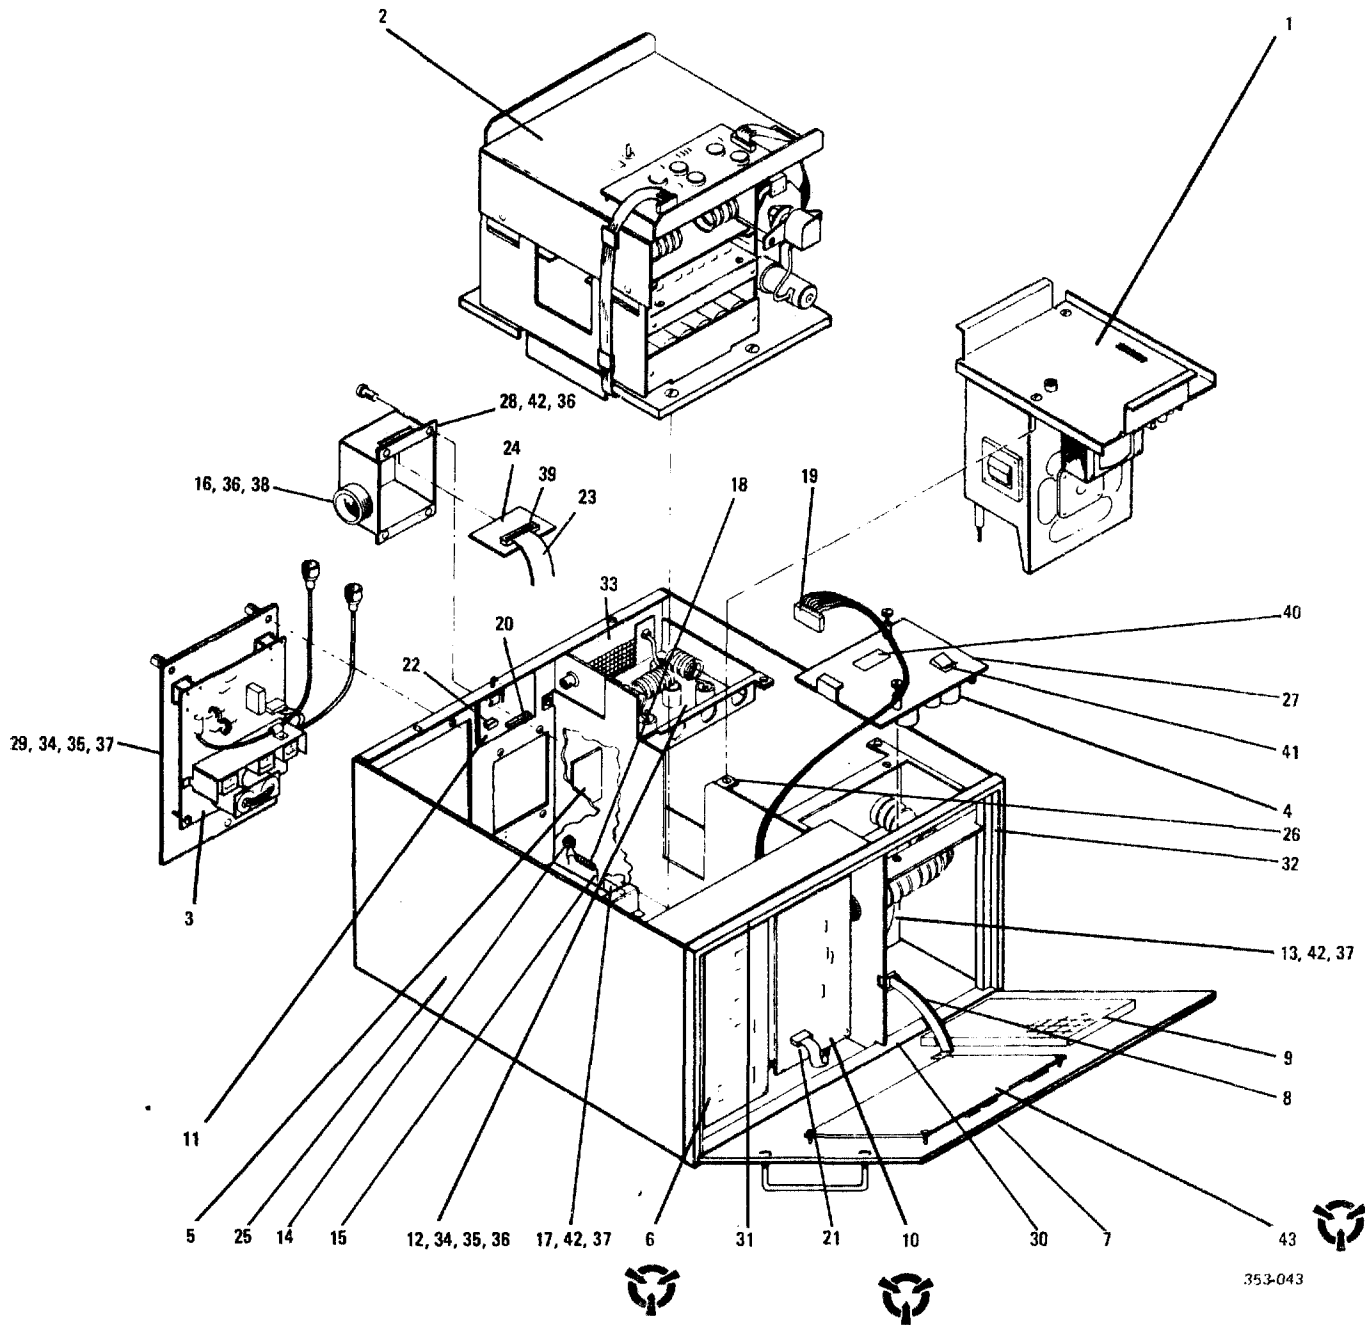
1 KW LPA, AM-7224/URC, Exploded View
